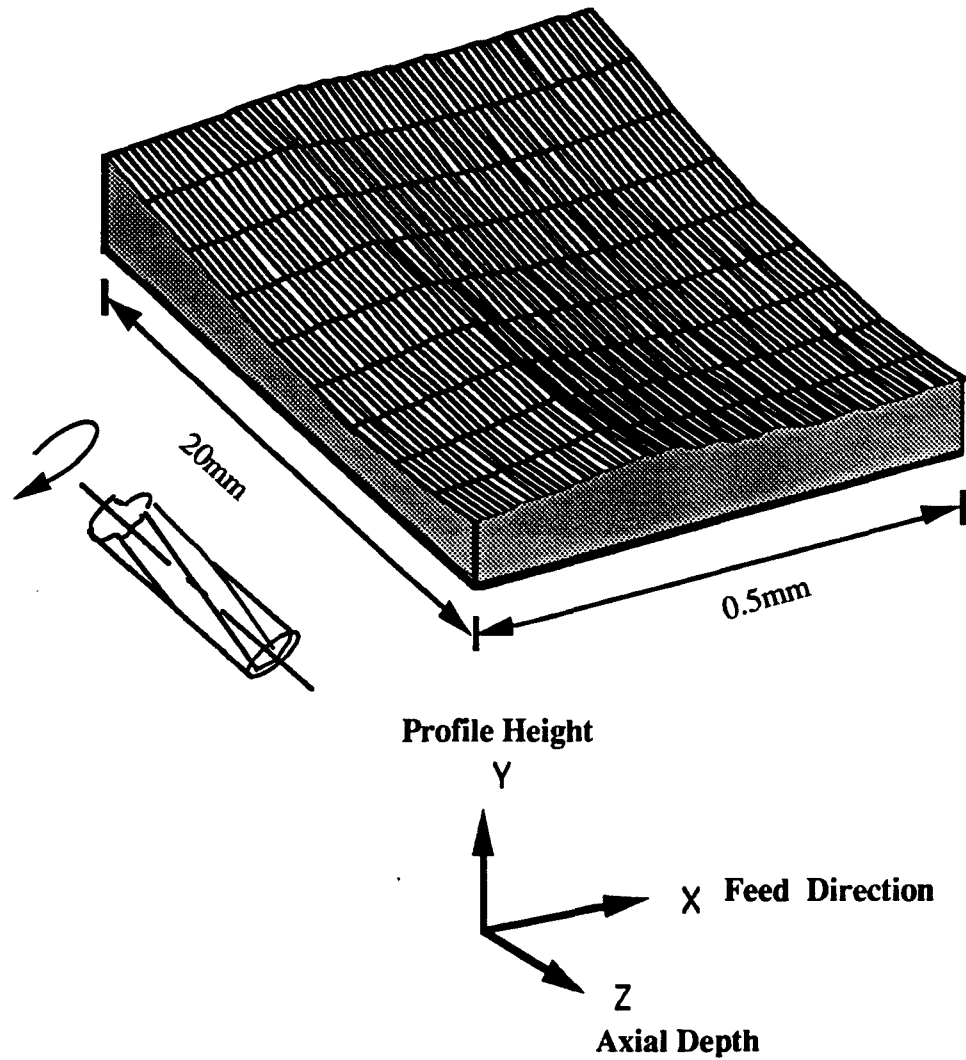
The 3-D geometry of end milling surface for a deflection case
